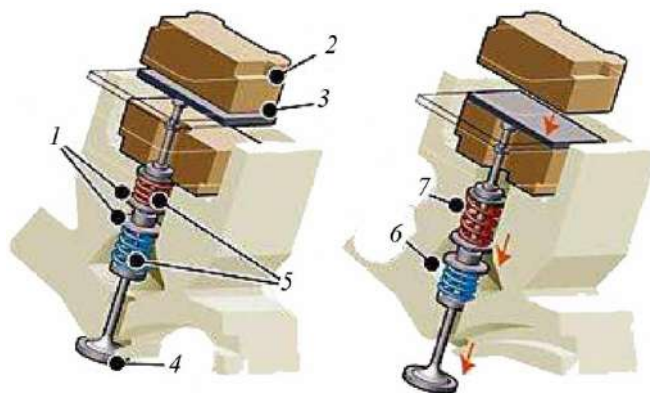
Electromagnetic valve mechanism *Valeo*: 1– washers; 2– electromagnet; 3– plate; 4– valve; 5– spring; 6– spring compression; 7– spring tension
